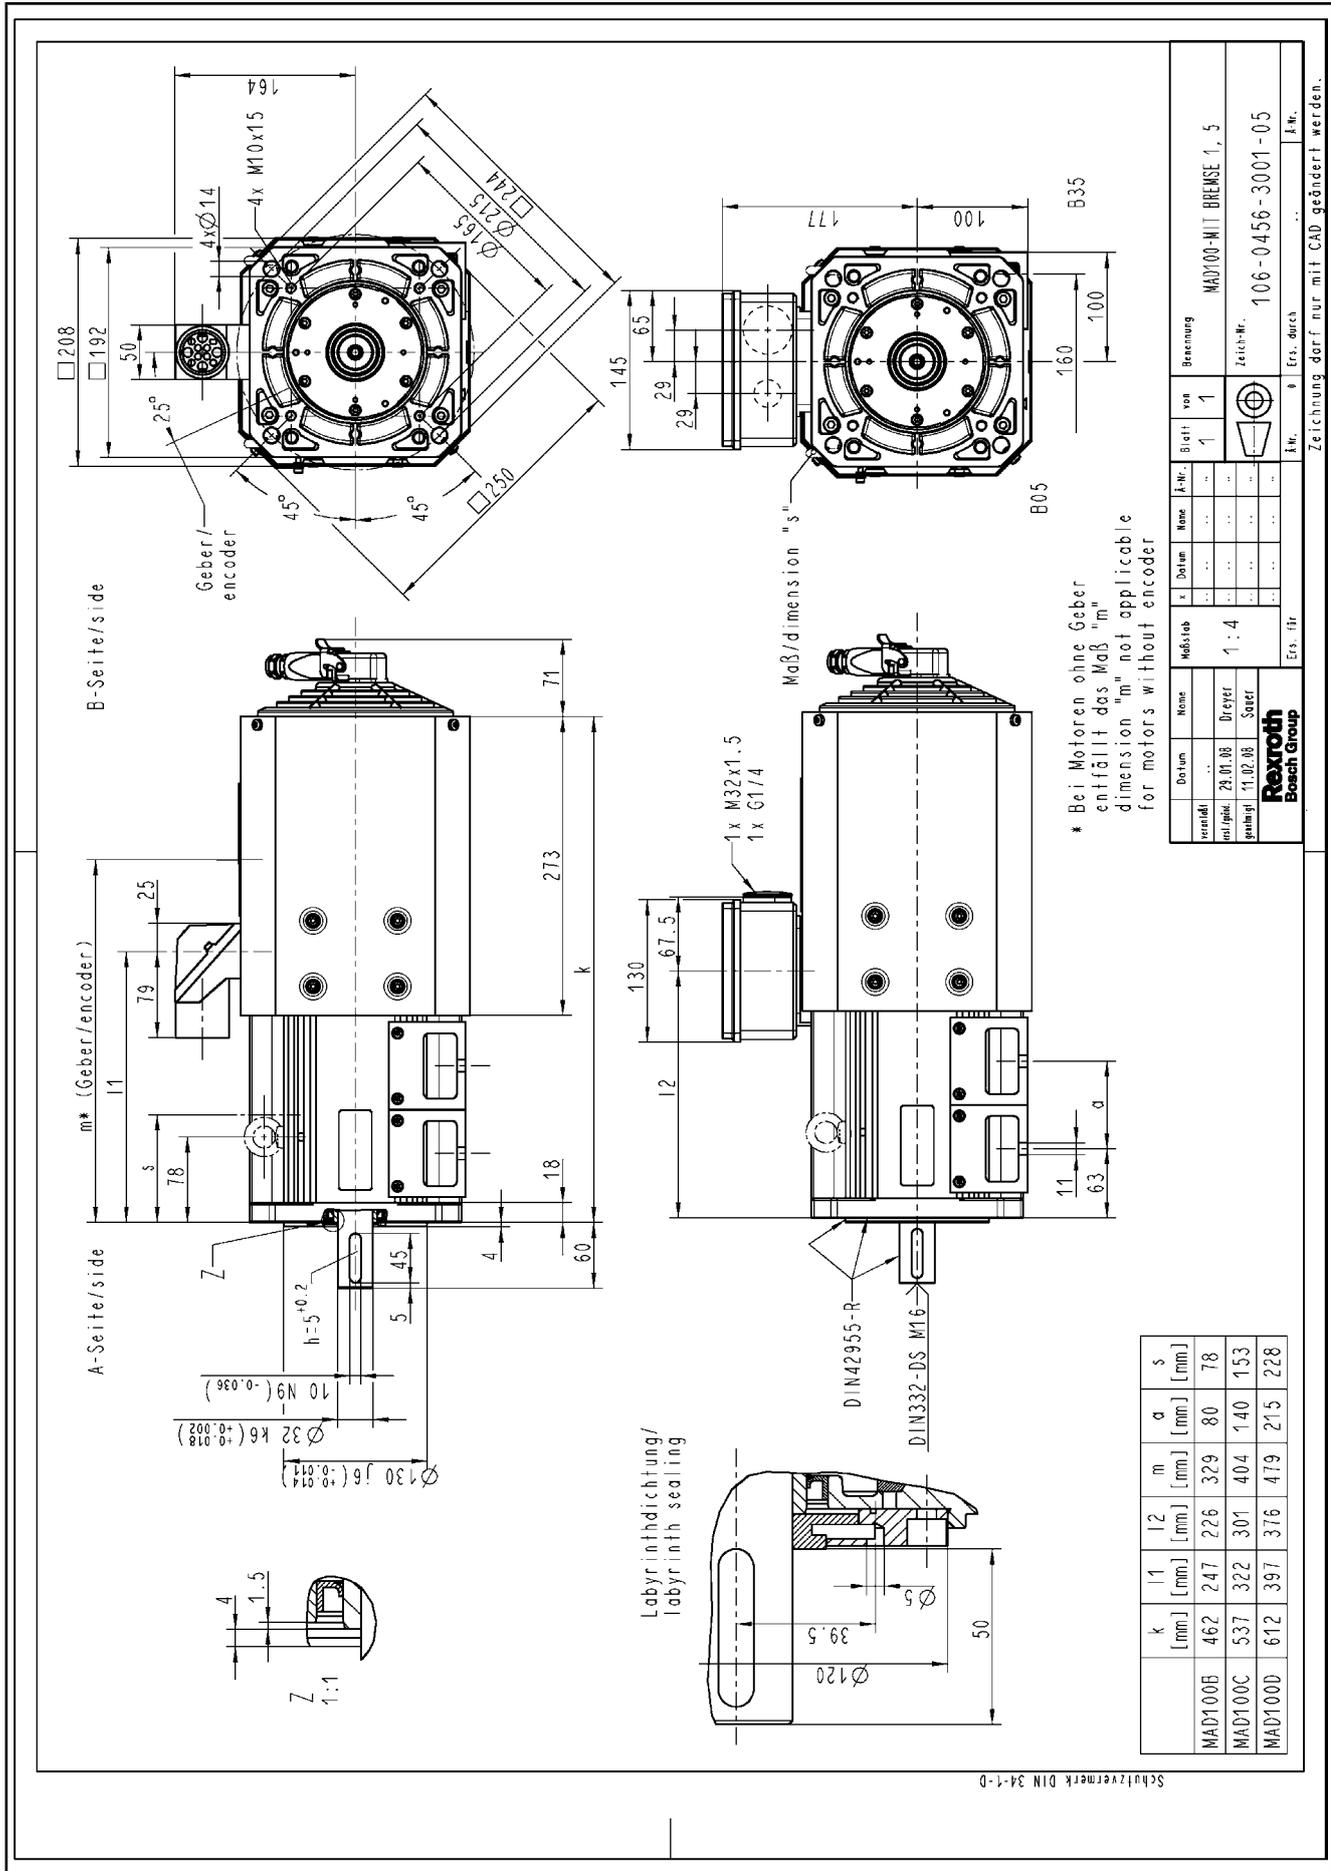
Dimension sheet MAD100 with brake 1/5
